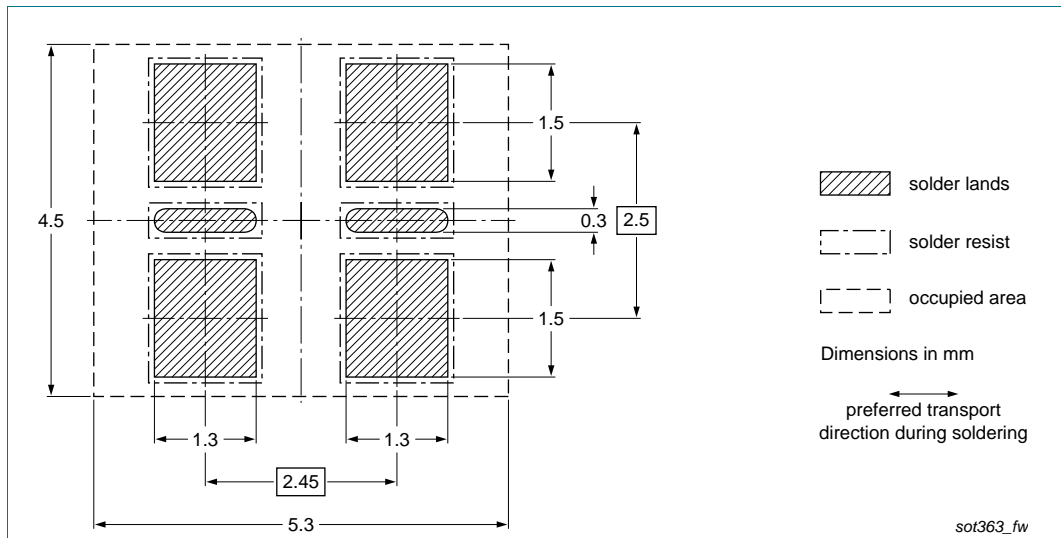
Wave soldering footprint BAS16VY (SOT363/SC-88)
